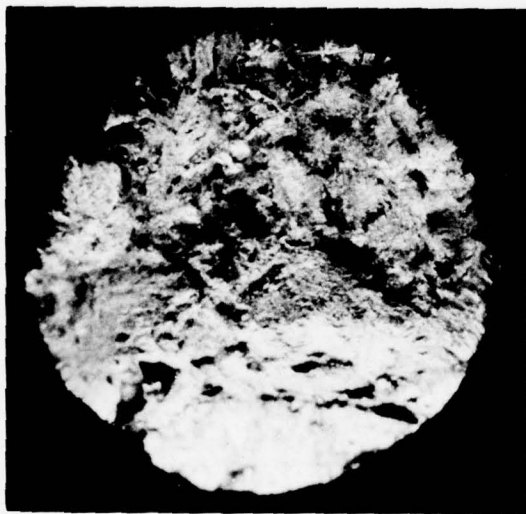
TENSILE FRACTURE, TYPICAL DUCTILE BREAK TRIAL PANCAKE ASSEMBLIES. 10X
